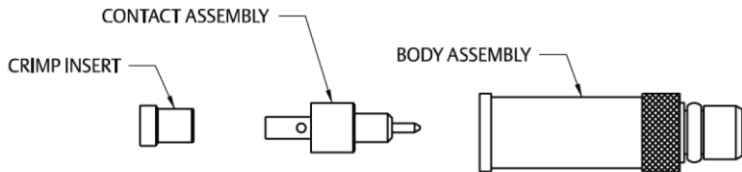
The three parts that make up a MMCX connector. Pictured above is the male version of the body assembly.
